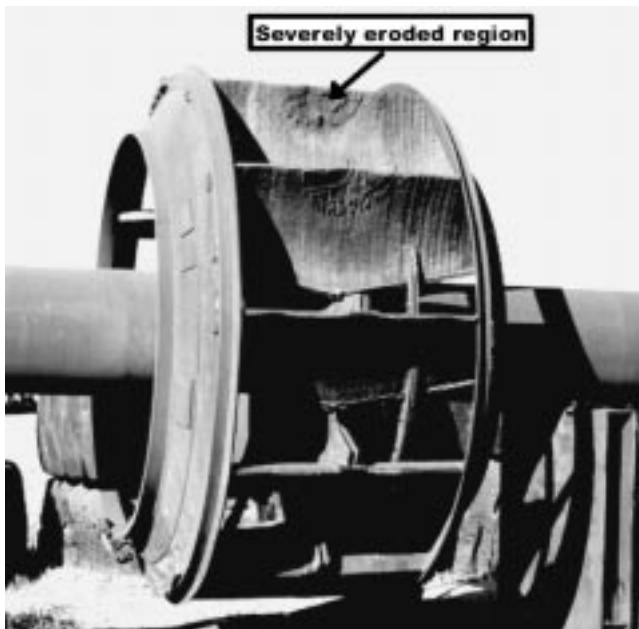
Photograph of a worn fan rotor showing damaged blades
